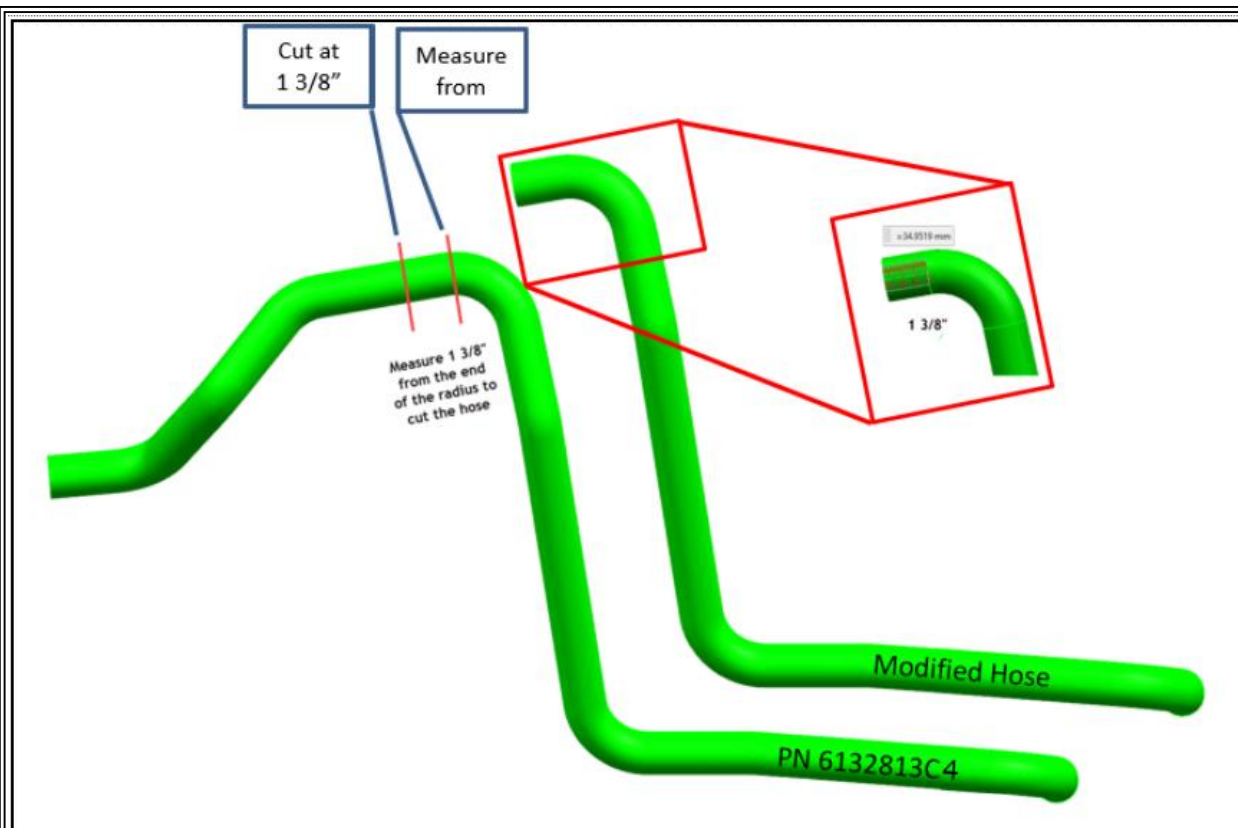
When modifying a 6132813C4 hose assembly measure 1 3/8" from the end radius.
